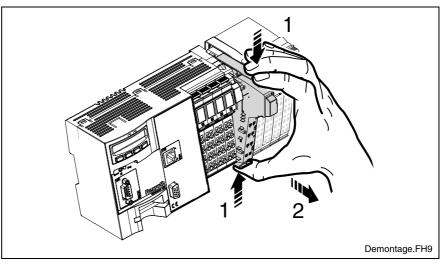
Before dismounting the IndraControl L20, the first Rexroth Inline module must be removed.
